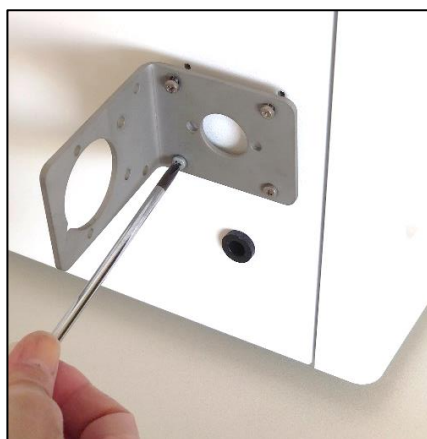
Use a Philips screwdriver to attach the bracket to the designated point on the left side of the detector.
